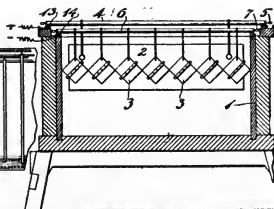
ENLARGED DETAIL VIEW OF TANK SHOWING ANODES IN POSITION
